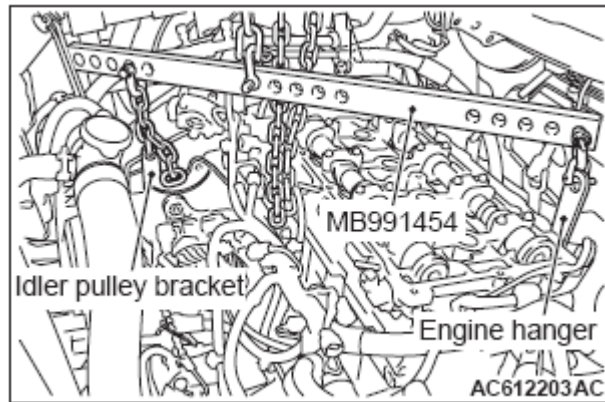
Securing Special Tool MB991454 To Engine Hanger And Idler Pulley Bracket
